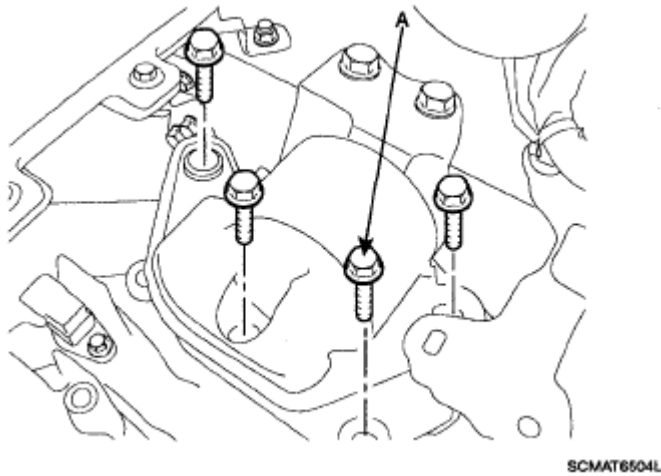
Identifying Transaxle Insulator Mounting Bolt
